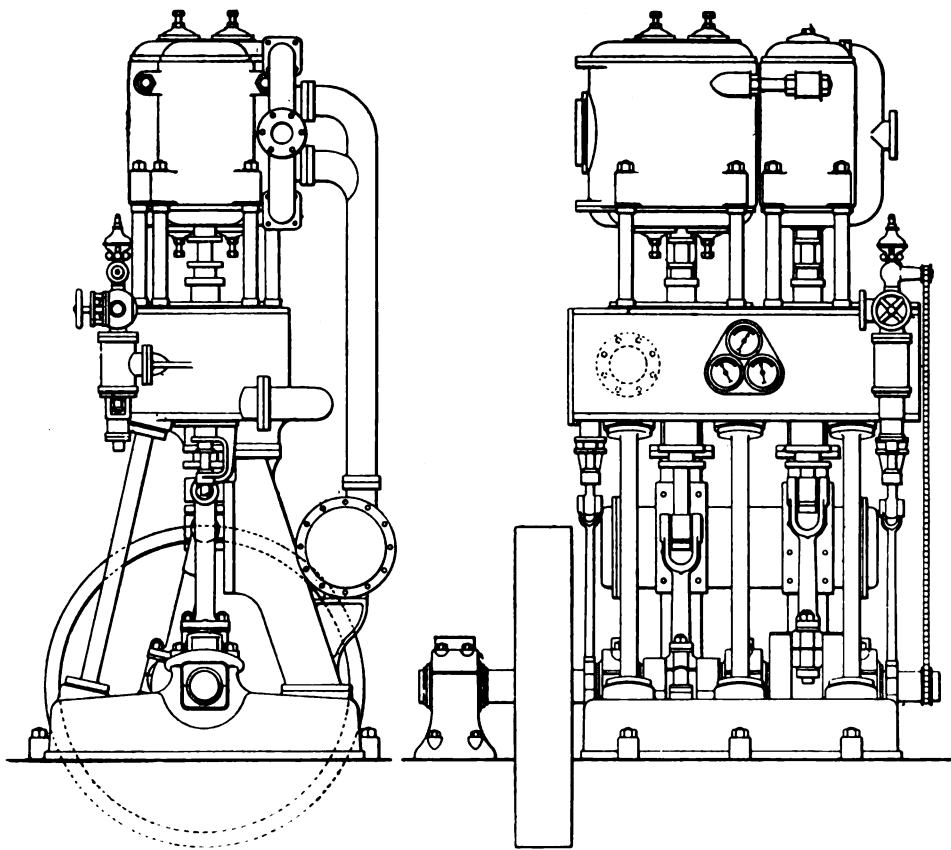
SECTIONAL VIEW OF COMPOUND BELT-DRIVEN COMPRESSOR.
